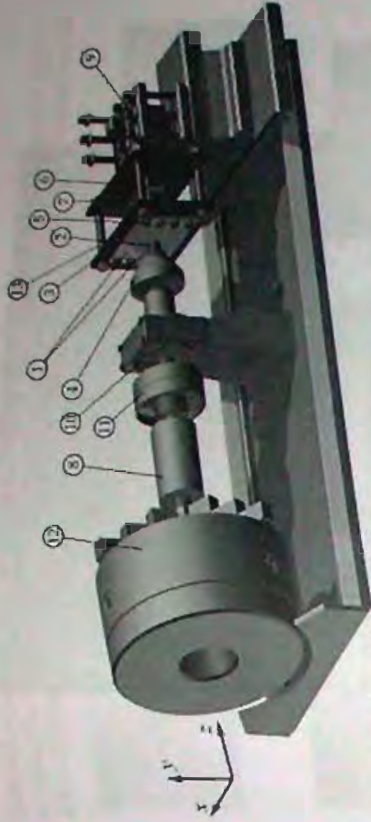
FSW welding place, 1-workpiece, 2-welding tool, 3-anvil, 4-welding tool spindle, 5-bolts, 6-backing plate, 7-force sensor, 8-torque sensor, 9-tool rest, 10-housing, 11-coupler, 12-machine spindle, 13-fundamental bolts
